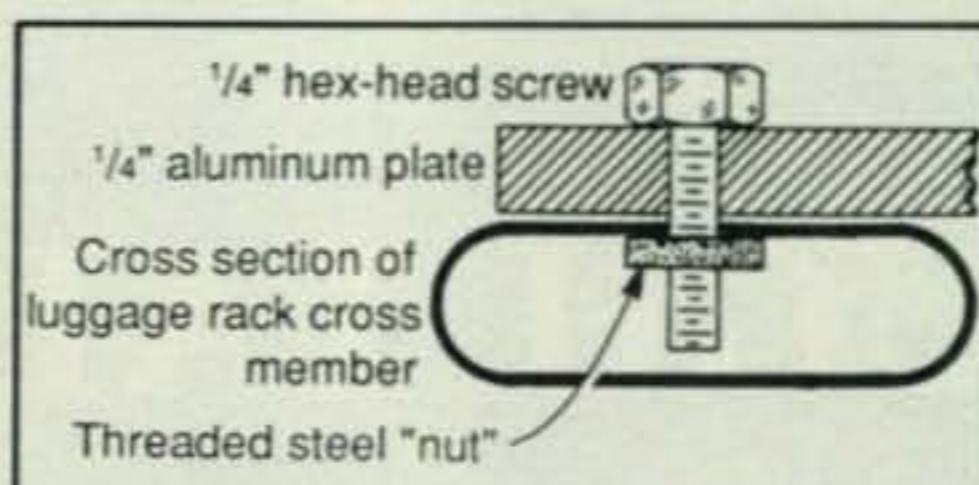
Simple mechanical requirements. Make sure that the hex-head screw is long enough to reach the captive nut resting on the bottom of the channel so that it can begin threading.
